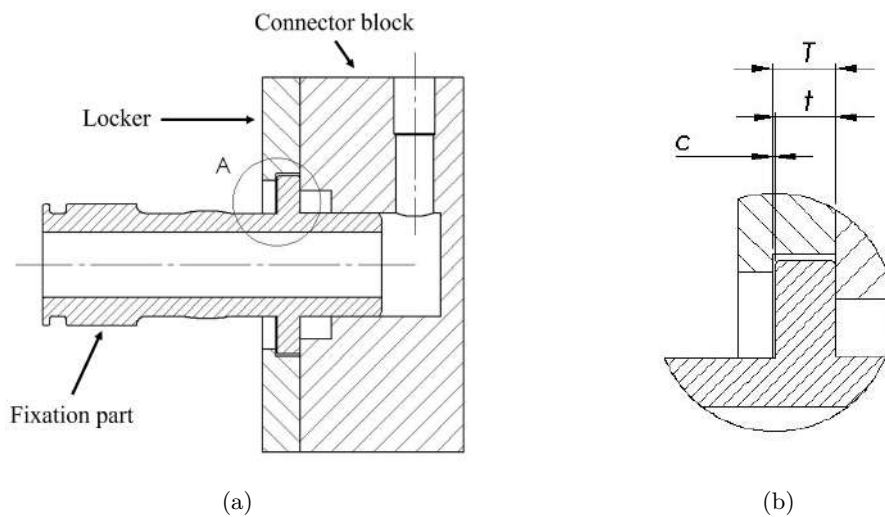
Assembly of fixation part and locker on connector block. (a) Section view of the assembly. (b) Detail A with design clearance.
